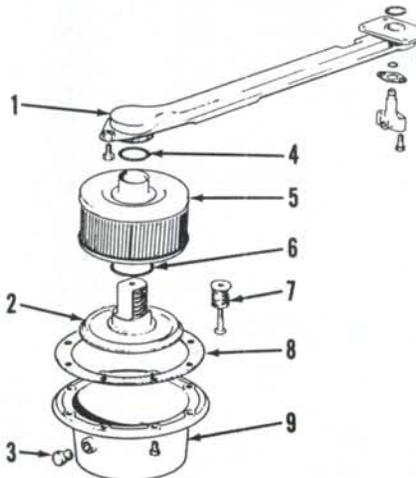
Exploded view of hydraulic pump suction filter assembly used on 1190, 1194, 1290 and 1294 models.
